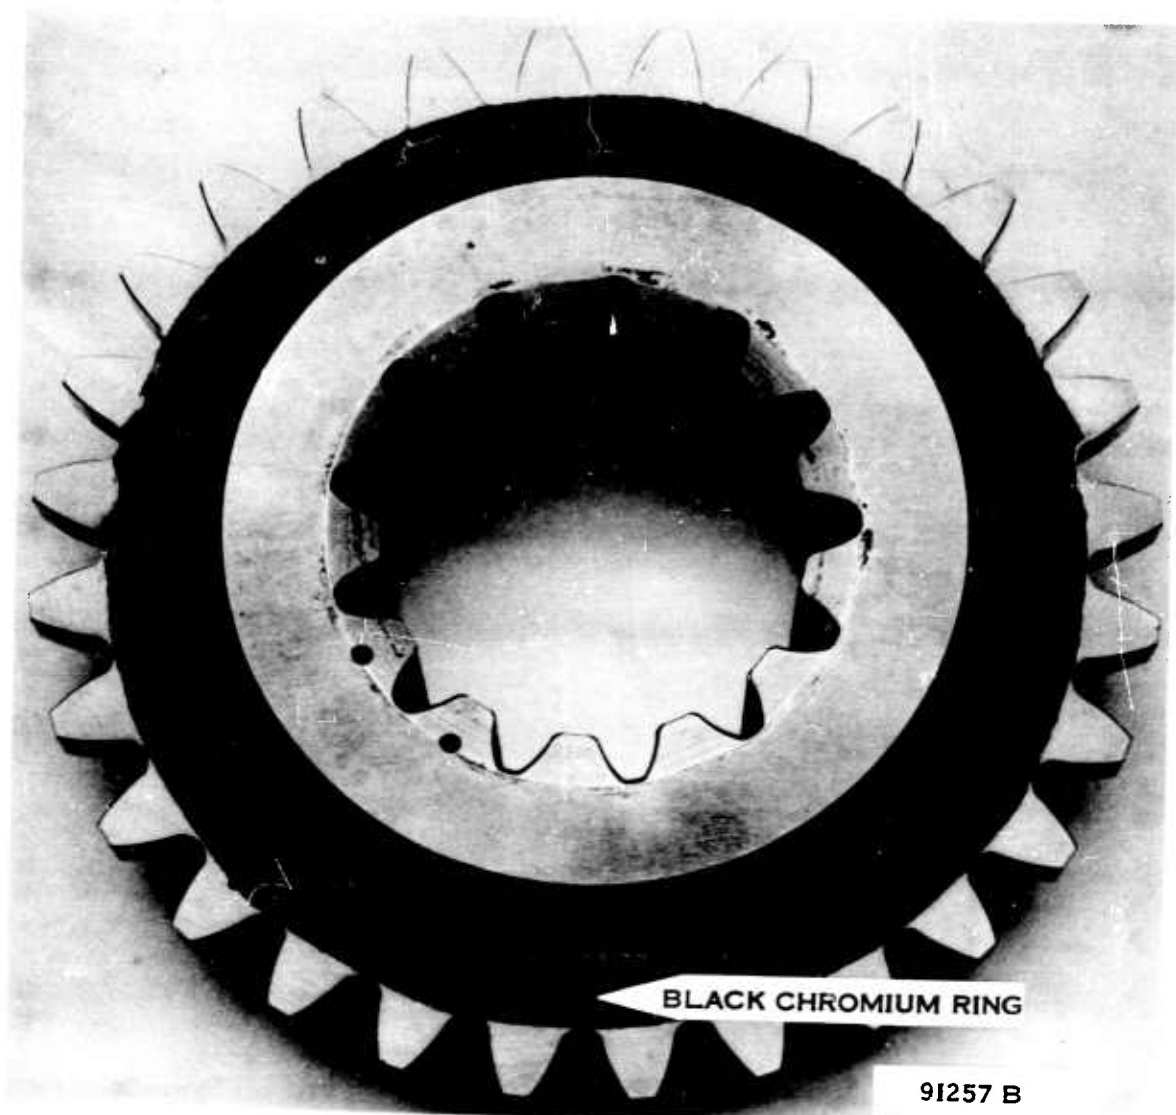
NARROW TEST GEAR WITH BLACK CHROMIUM
